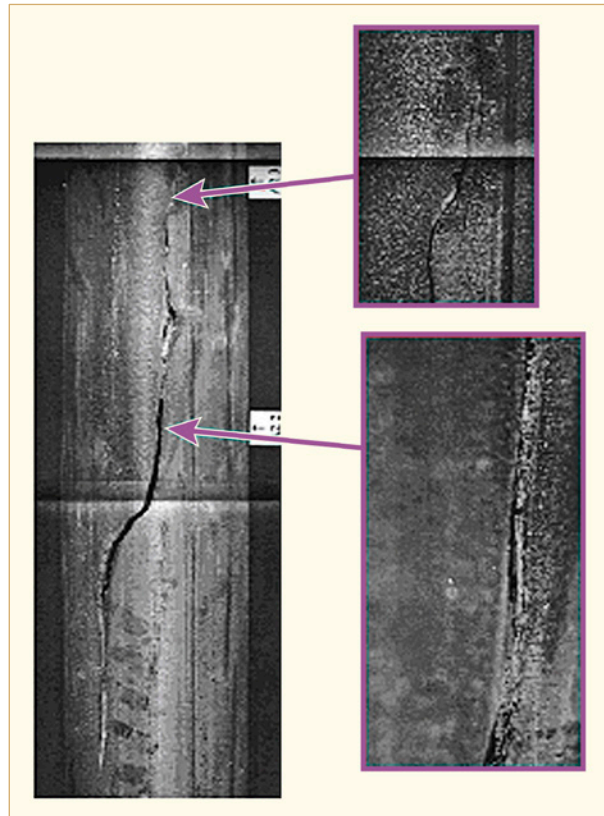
Visual inspection of a failed rod showing a long axial crack at the 591-626 mm elevation above the bottom end plug.
